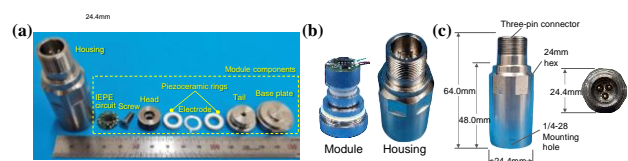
(a) Accelerometer sensor components and 0.96KNN-0.03BNKLZ-0.01BS ceramic ring. (b) Accelerometer prototype with IEPE circuit attached (left) and 3PIN housing (right). (c) Fabricated IEPE type accelerometer sensor and external dimensions.
